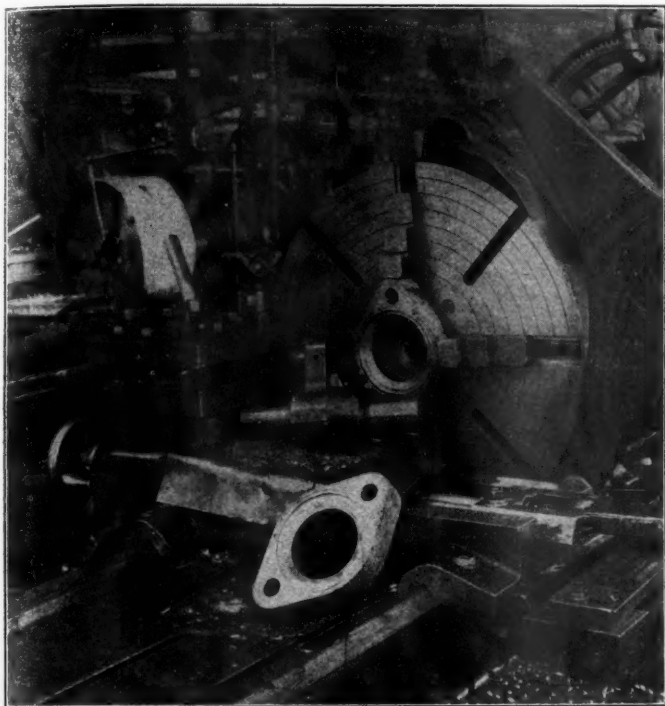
Tool With Five Cutters For Finishing Inside of Piston Rod Gland.
